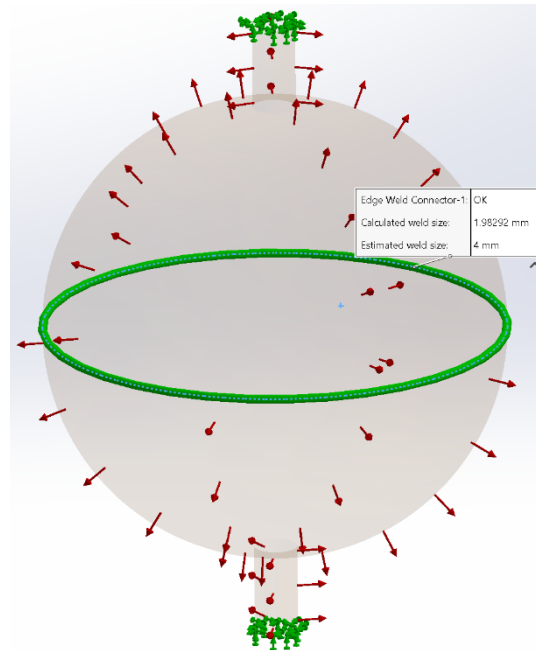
Traditional PV Weldment @ 1600 PSI
